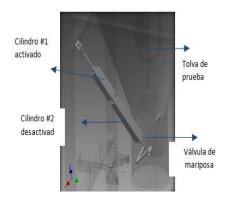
Mechanism of closing / opening intermediate position In the bag clamping mechanism employs two pneumatic cylinders that are located perpendicular to the position of the hopper, that is the grip that the bag will be held through the force exerted by the two pistons towards the wall of the mouth of the hopper. (Fig.4)
